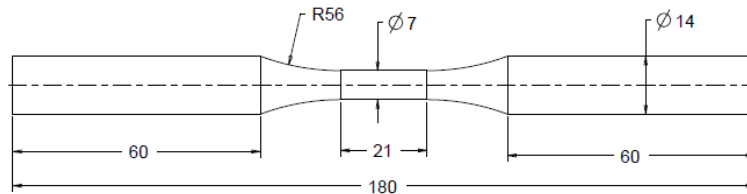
Geometry of fatigue test specimen acc. to ASTM E466
